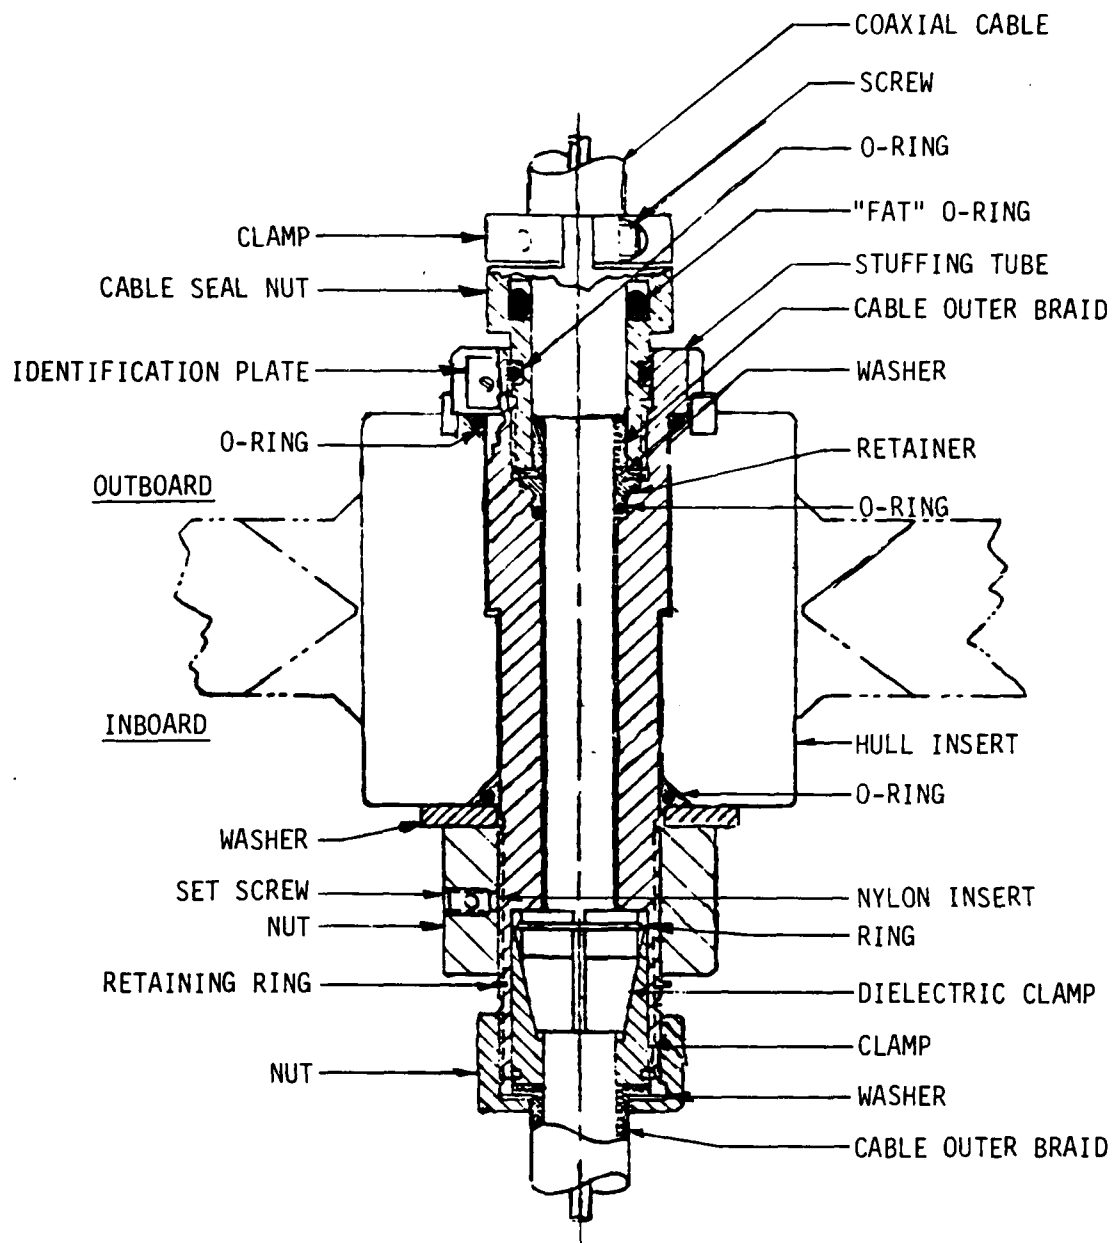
SUBMARINE COAXIAL CABLE HULL PENETRATOR
